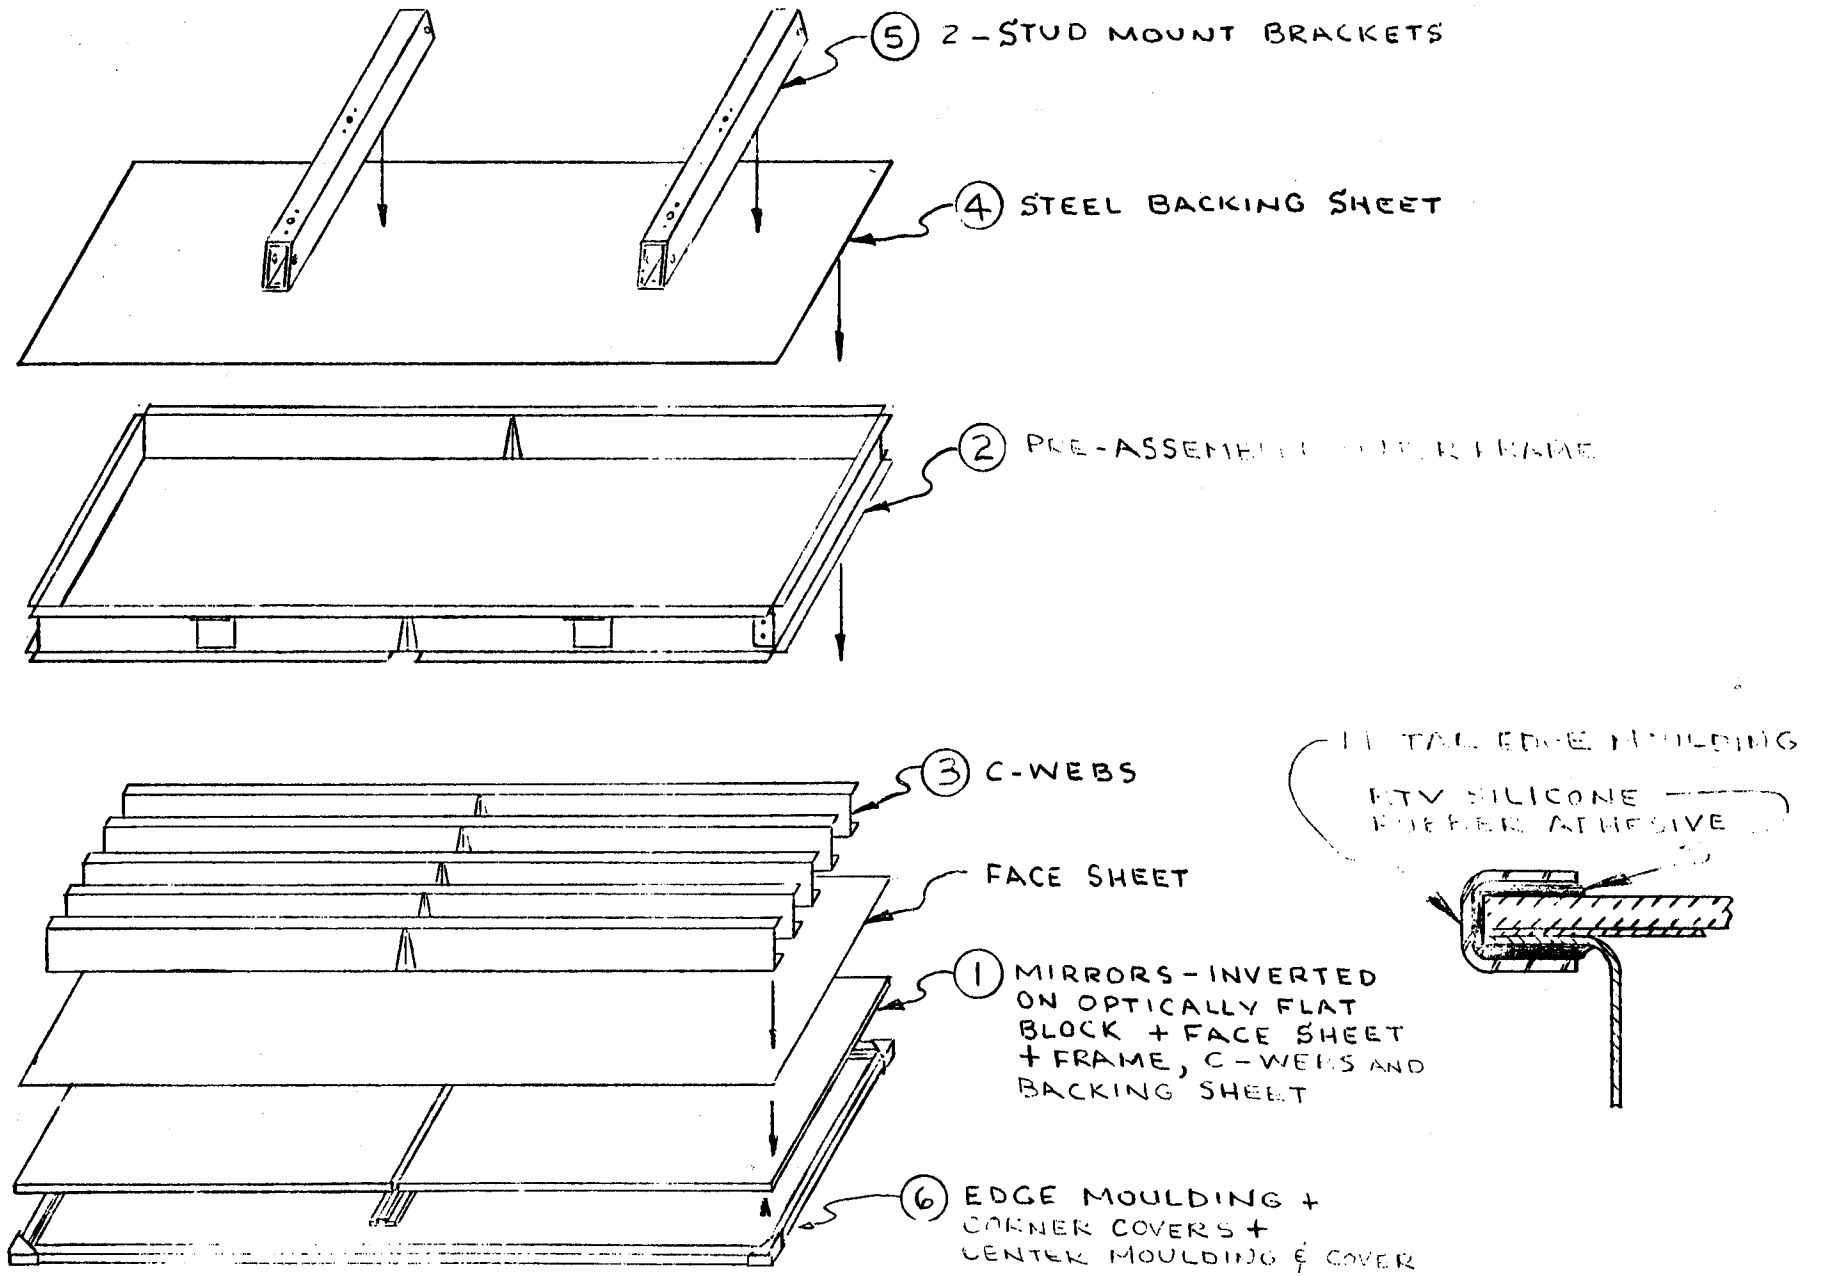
MIRROR MODULE EXPLODED VIEW
